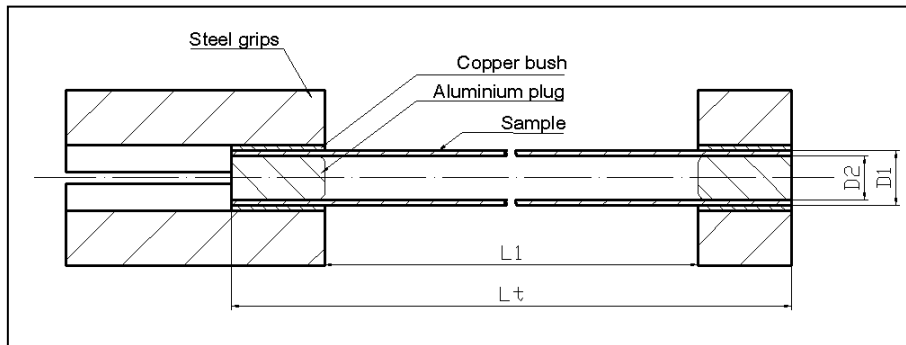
Clamping used for torsion test of CFRP pultruded tubes [74].
